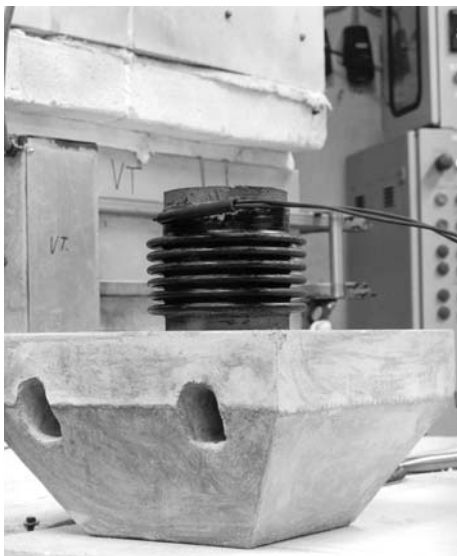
Photo of a diffusion weld box with a bellow compensating thermal mismatch or plastic compression of the work piece.
